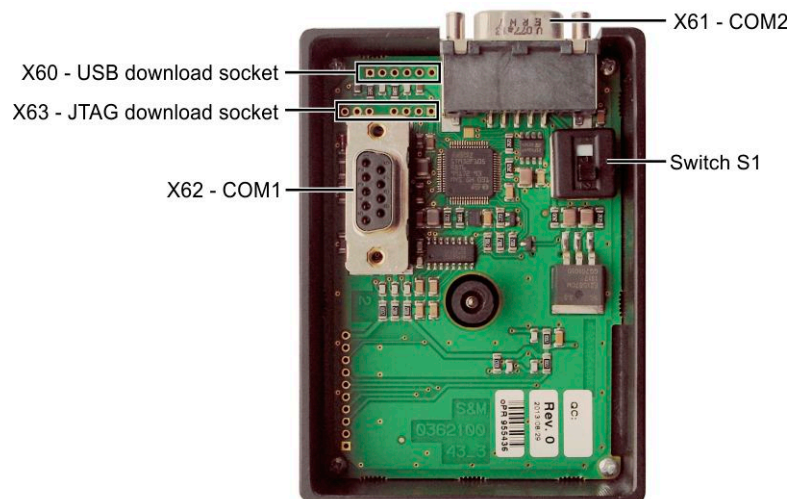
PCB version 036210043.3 (example illustration of operating terminal 0362150)
